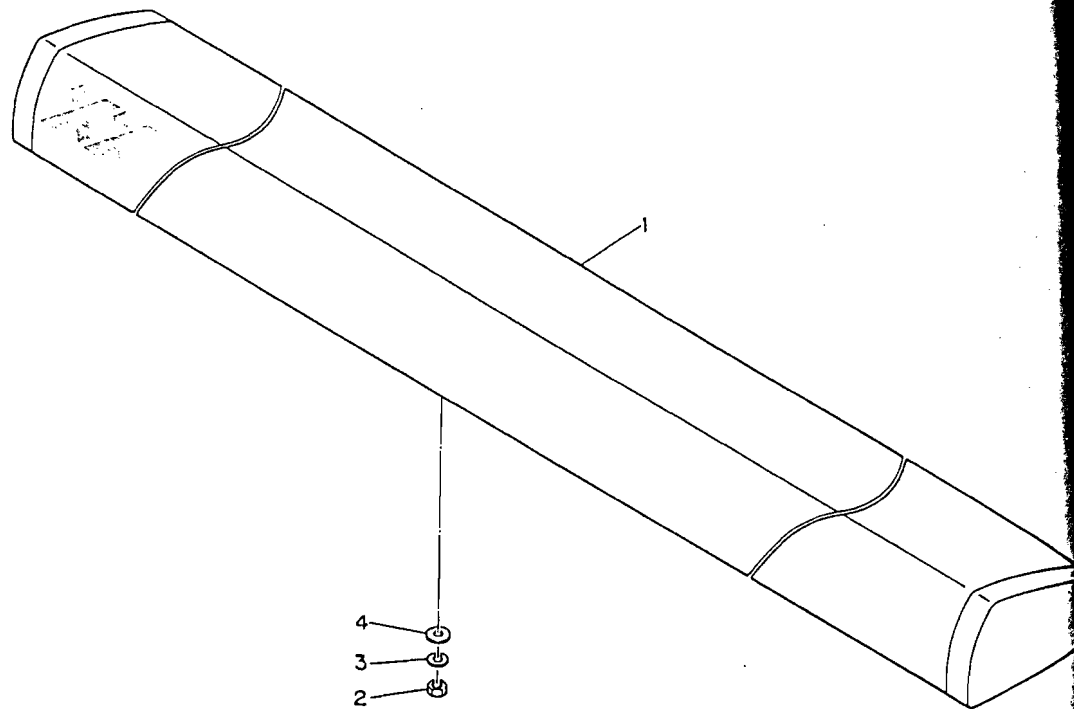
ASSEMBLY DRAWING, R21XX OPEN ARRAY RADIATOR UNIT (M92543)
